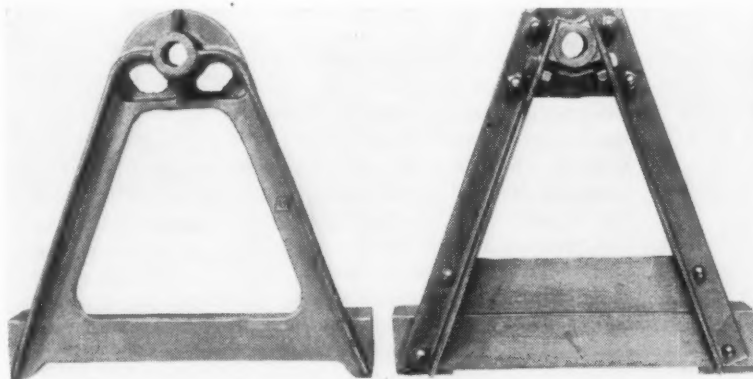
MALLEABLE-IRON CASTING REPLACES ASSEMBLED UNIT
